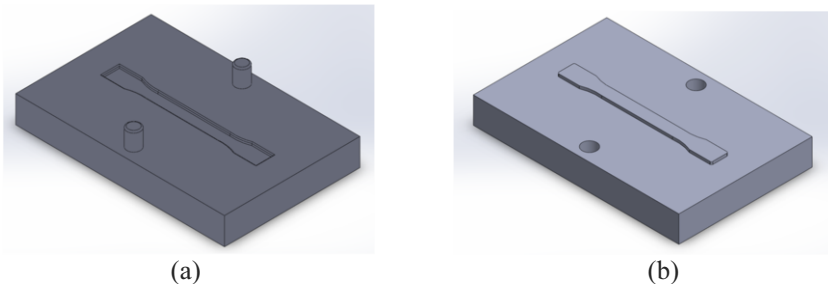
Mold model (a) Cavity and (b) Core developed in SolidWorks CAD version 2016
